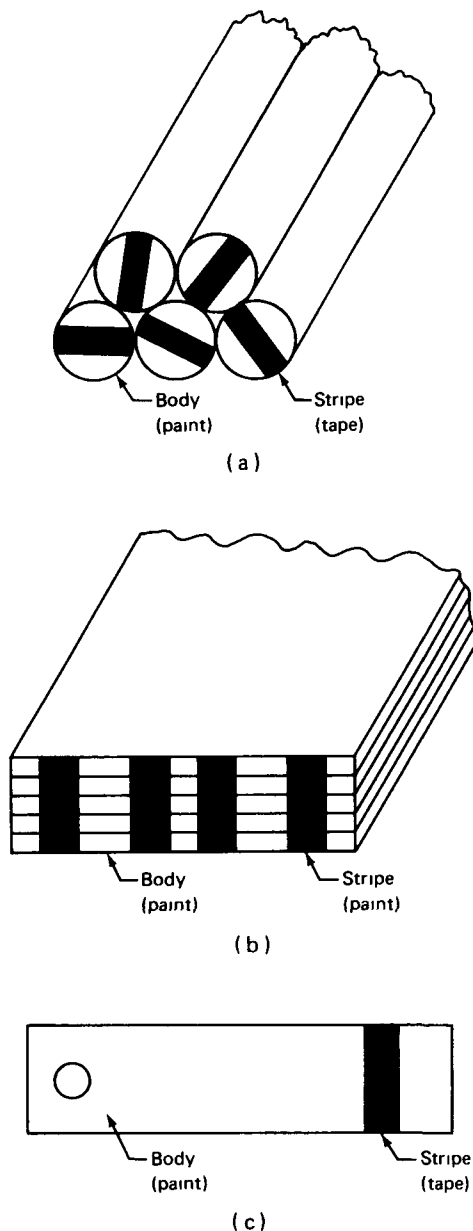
A.1—Coding application (a) Bars, rods, and shapes (b) Sheet and strip and plate stock (c) Coiled strip, wire, and tubing
